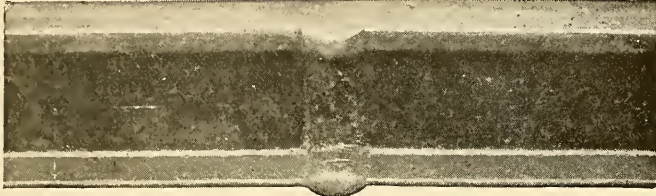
Finished Thermit Fully Welded Insert Joint.
